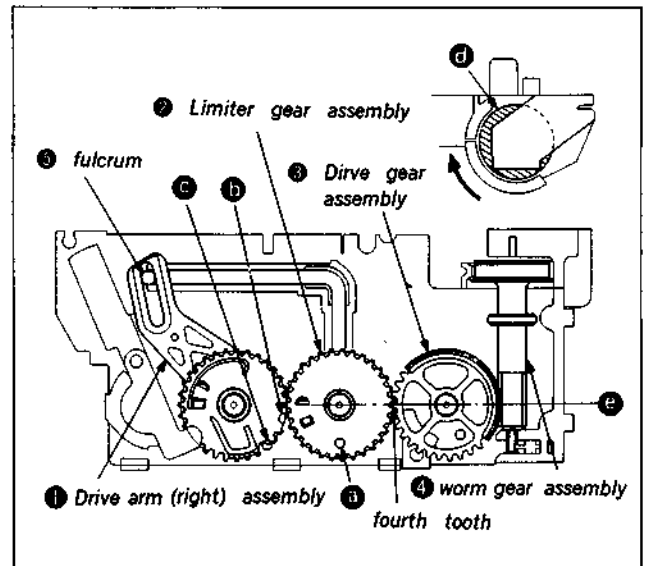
A. Adjustment method of position (Phase) matching of right gear wheel
